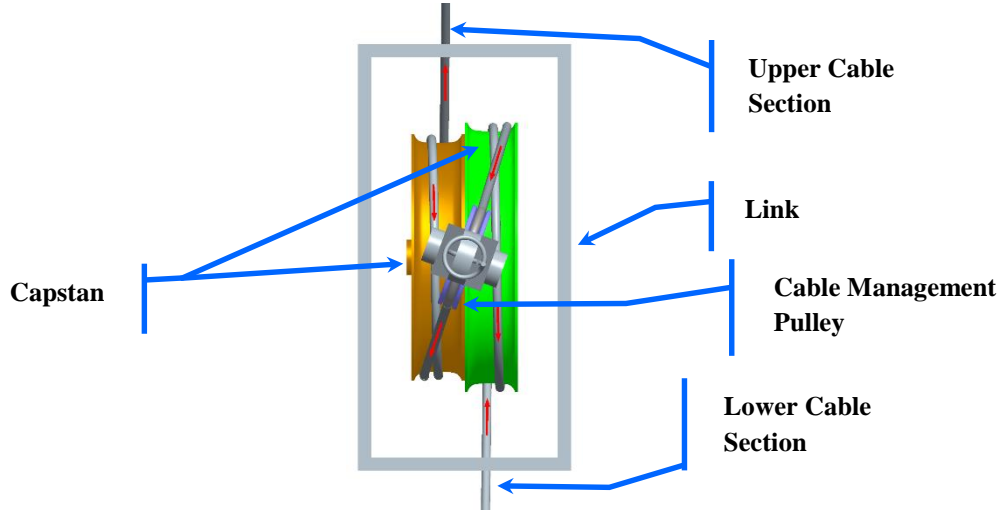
Antagonistic capstan arrangement, looking from joint towards capstan.
